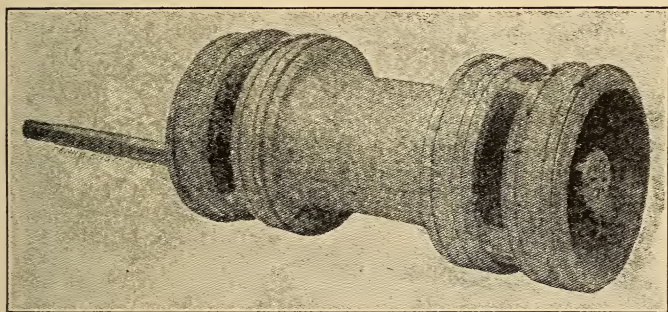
PISTON VALVE USED ON VAUCLAIN COMPOUND LOCOMOTIVE.
